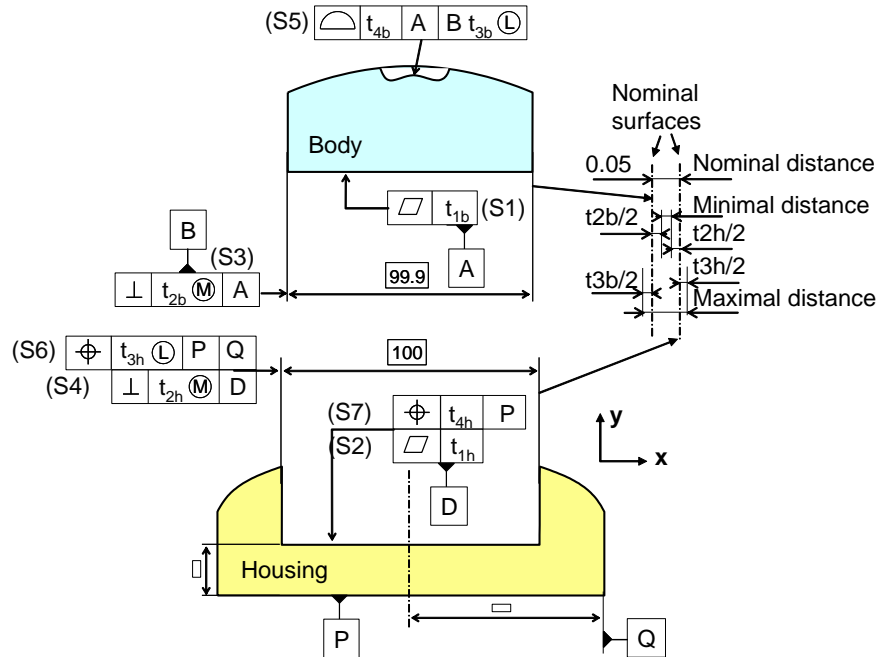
Tolerancing with primary plane and secondary slot
